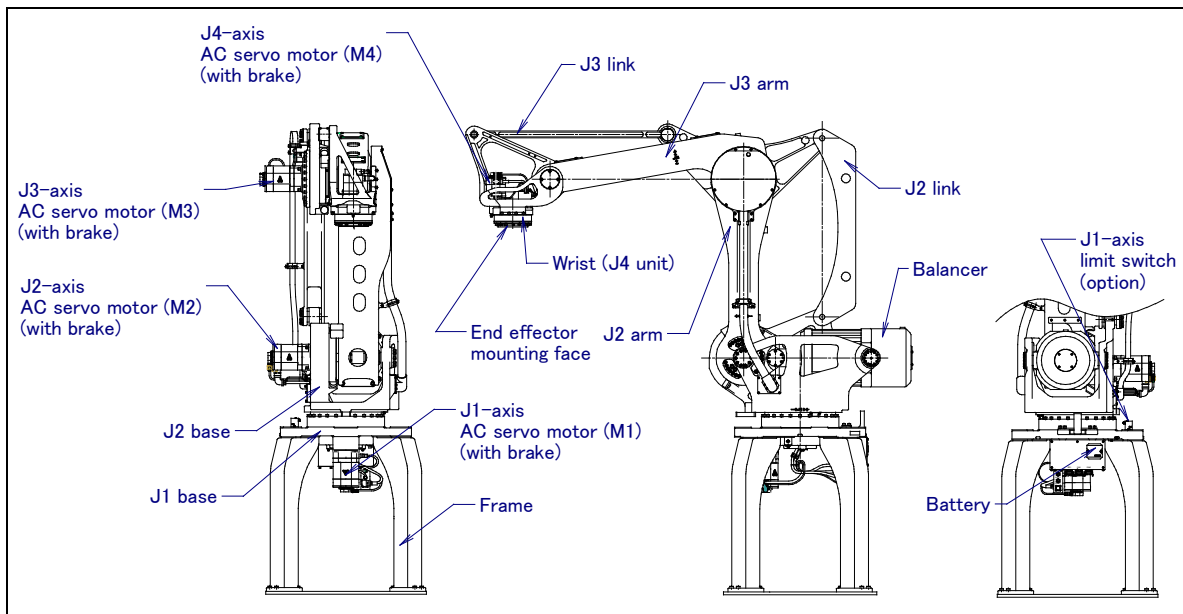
(b) Mechanical unit configuration (Remote type controller)
